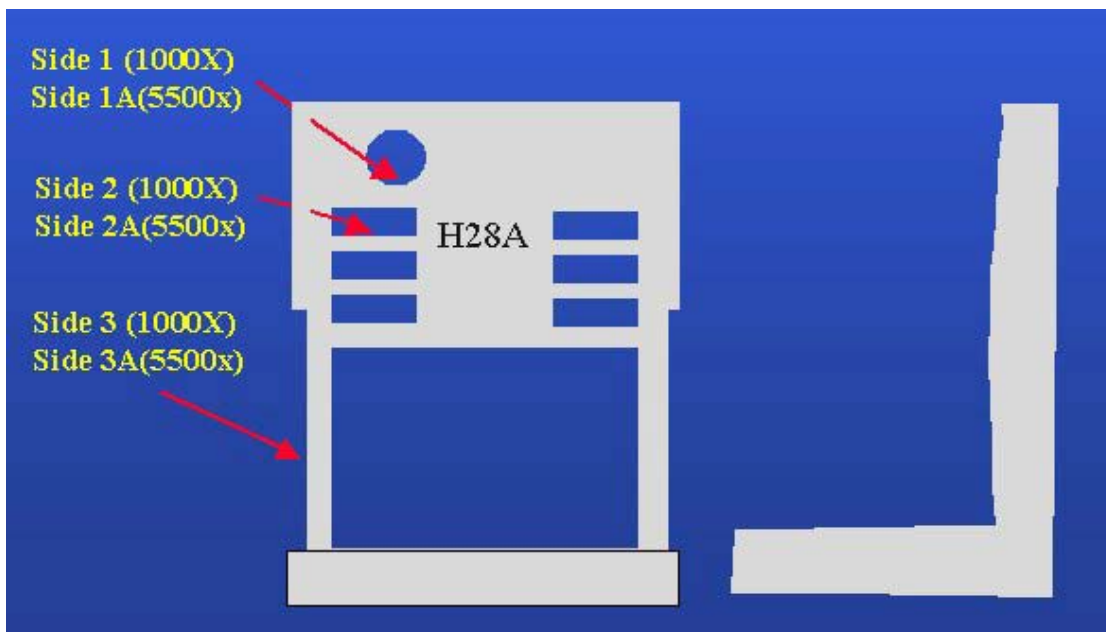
Inspection areas on side surfaces of lead-frame samples. The side elevation shows that the lead-frame was bent at 90° to present the side wall surfaces to the electron beam more readily.
